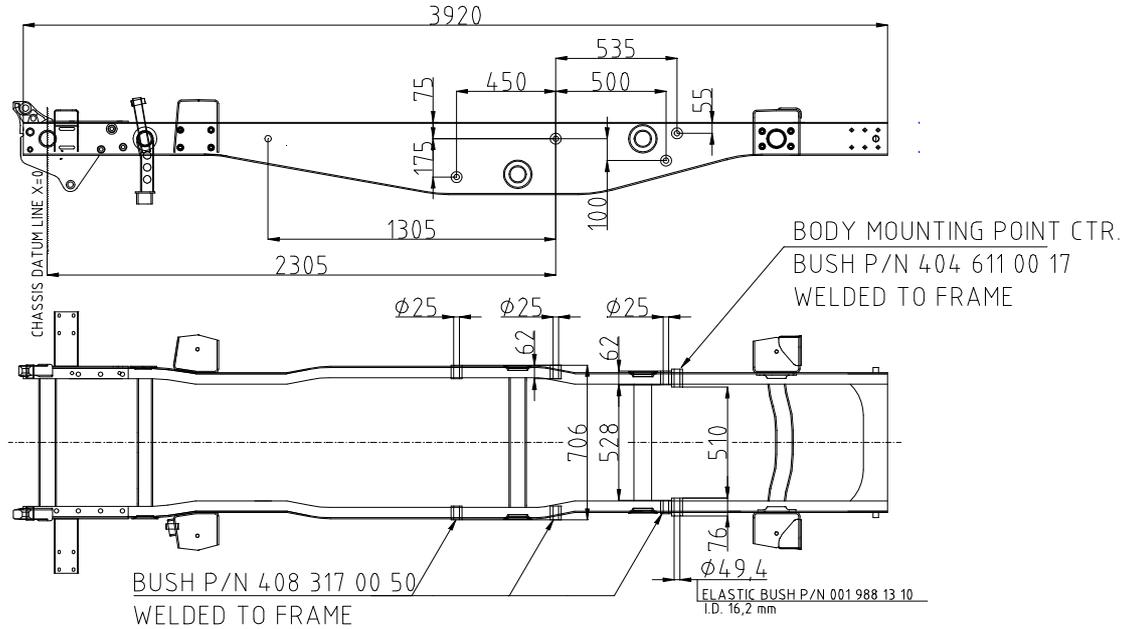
Center implement points, frame U 90 Turbo, BM 408.101 (standard, bushings welded in)
